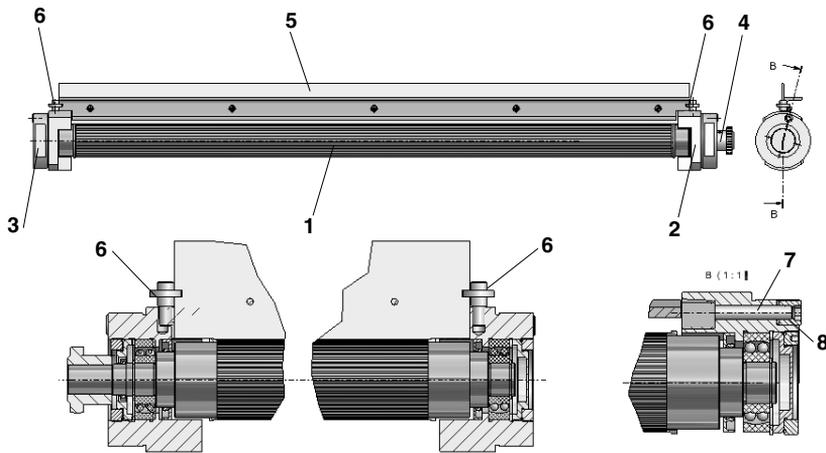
Dosage shaft unit: 1 – grooved roller, 2 and 3 – bearing, 4 – clutch driver, 5 – squeezegee, 6 – bolts for the adjustment of the gaps, 7 – clamping wedge, 8 – lid of the clamping wedge
